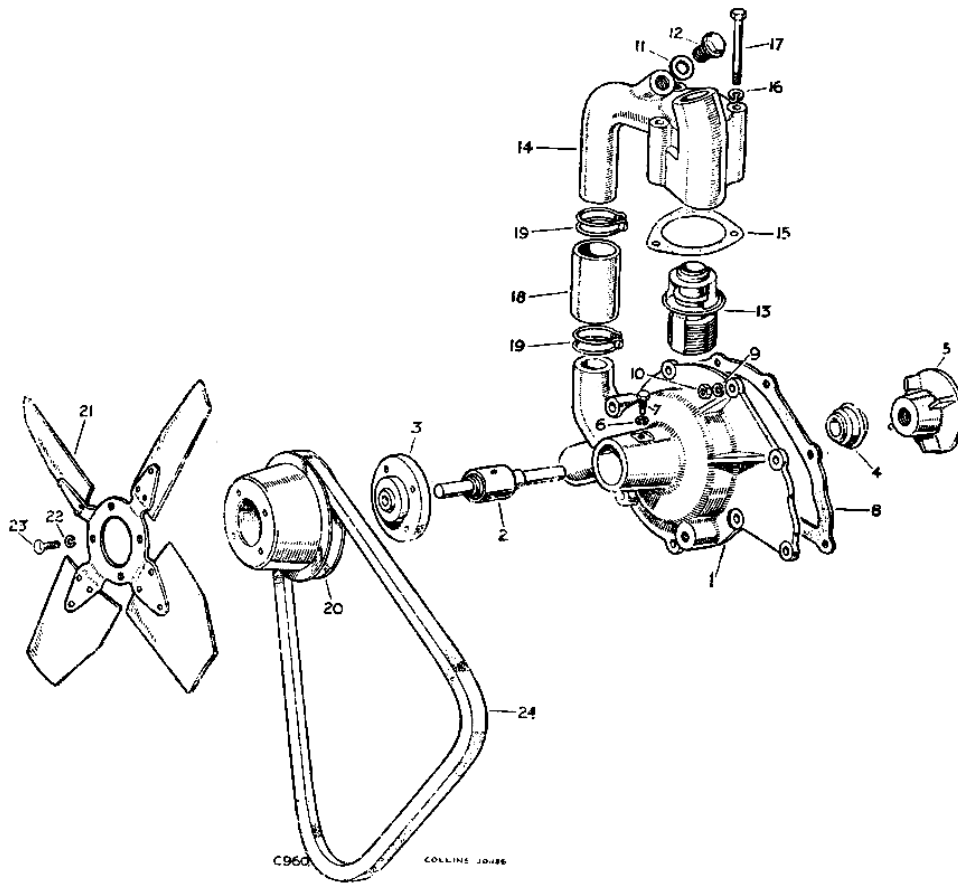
Layout of pump, thermostat and fan, Diesel Models.
